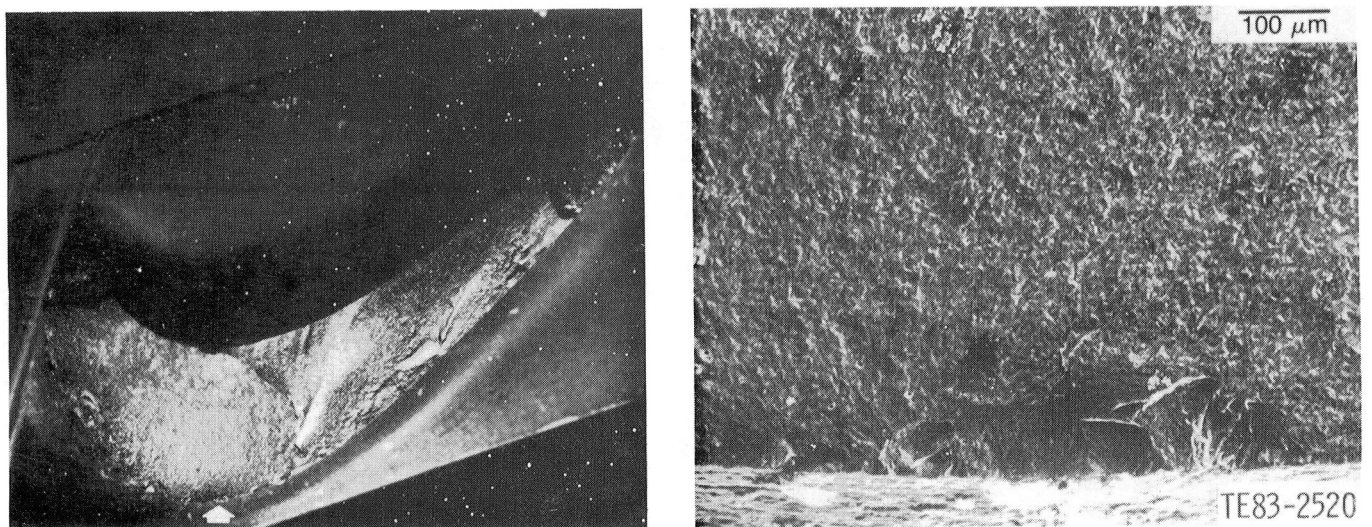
Blade fracture propagating along suction side of airfoil.
